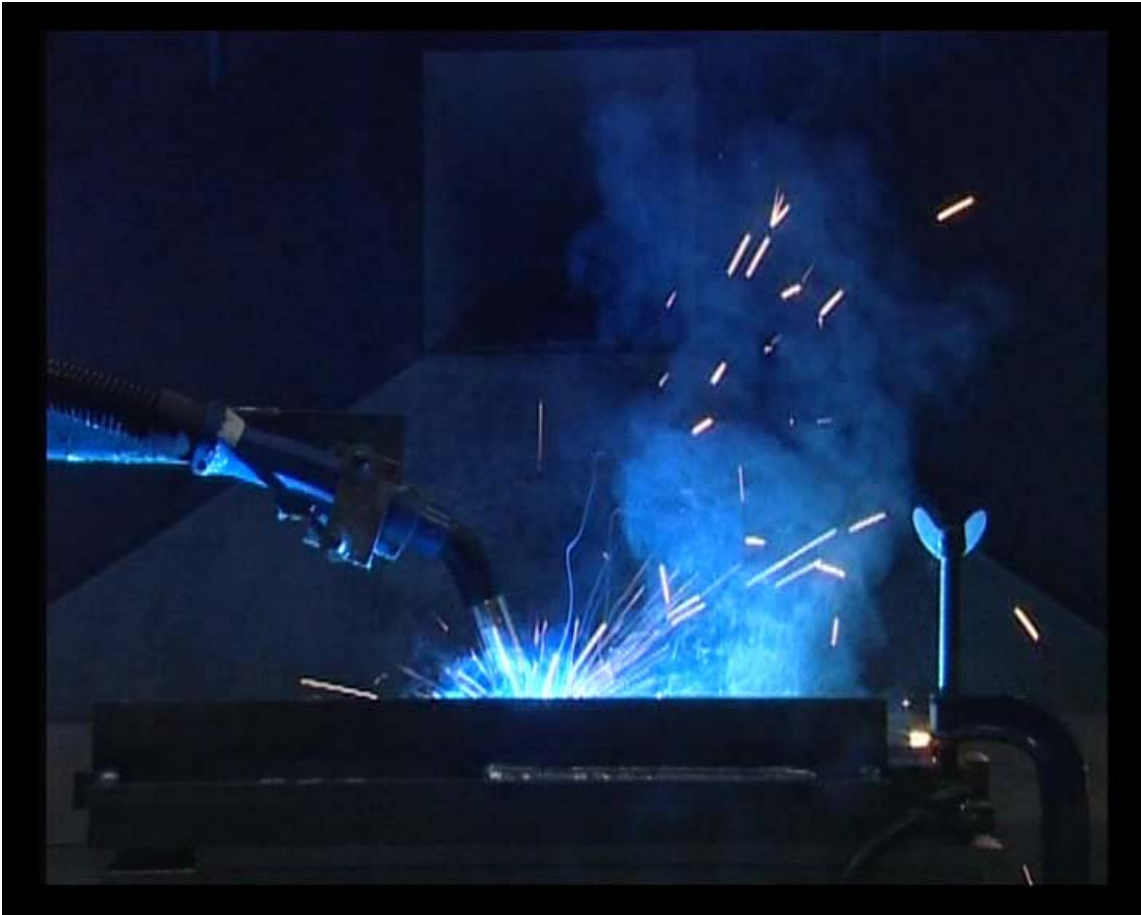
Bead on plate welding without extraction using a 1.0 mm wire
